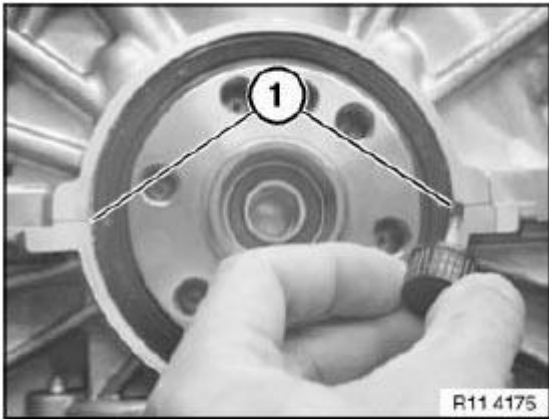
Inserting Brush Into Grooves On Crankshaft Radial Seal
